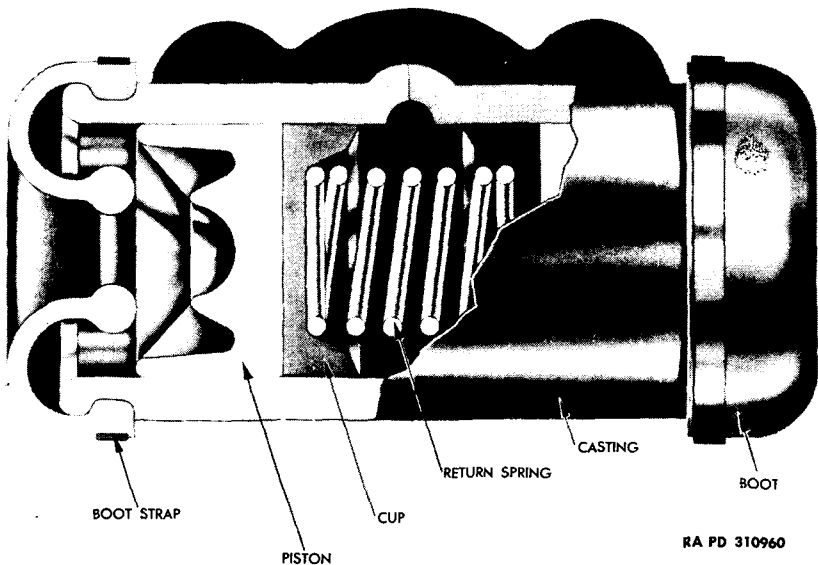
Straight-bore Wheel Cylinder with Socket Type Piston
